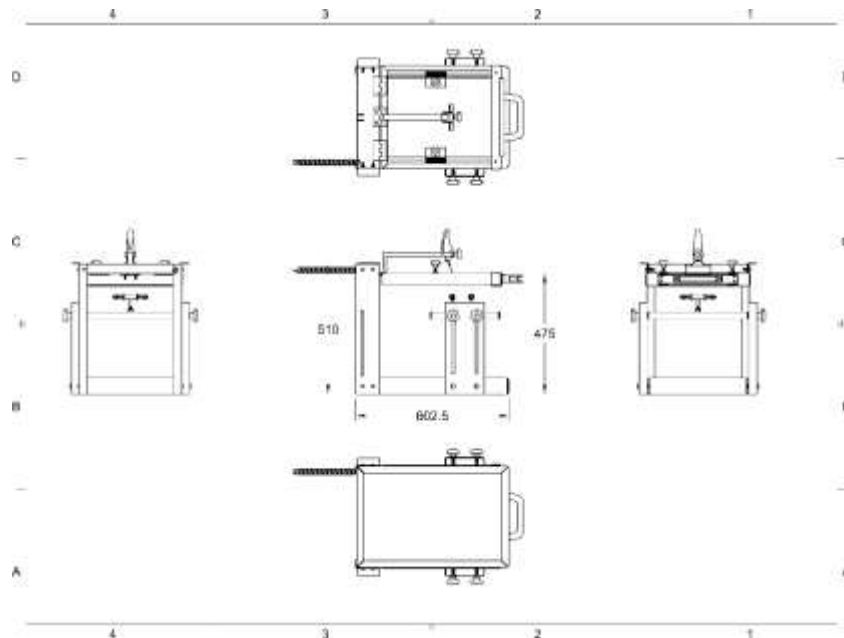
Schematic drawings of vital parts of the serigraphy printer
